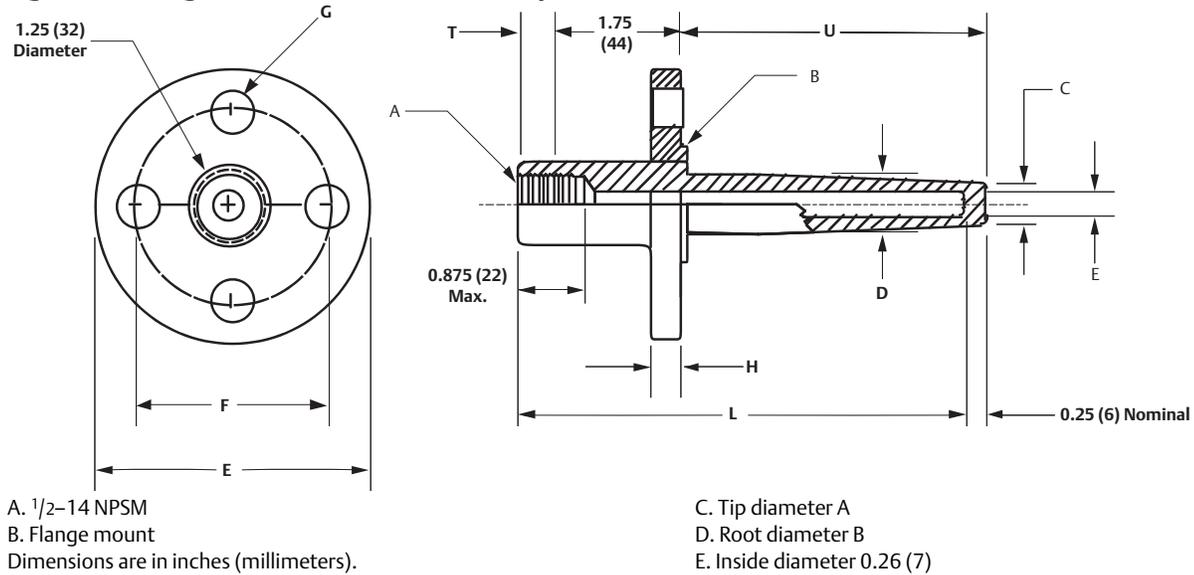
Flange Mounted Thermowells - Tapered⁽¹⁾
